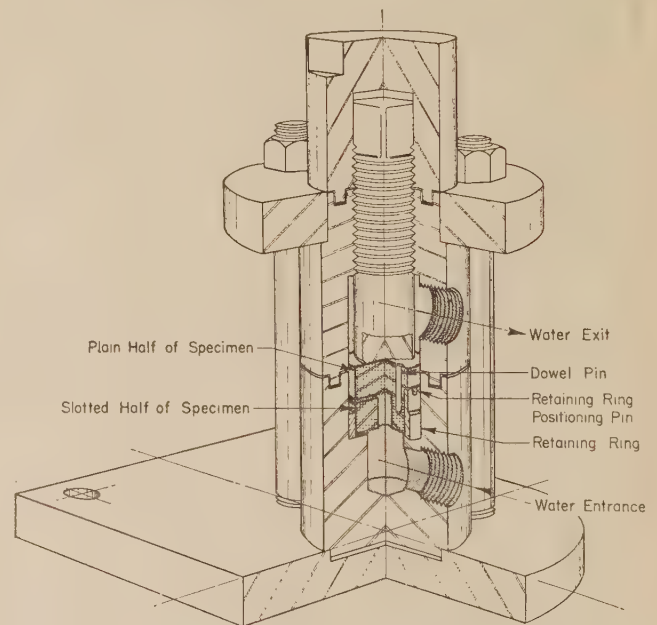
SECTIONAL VIEW, CORROSION-EROSION TESTER
